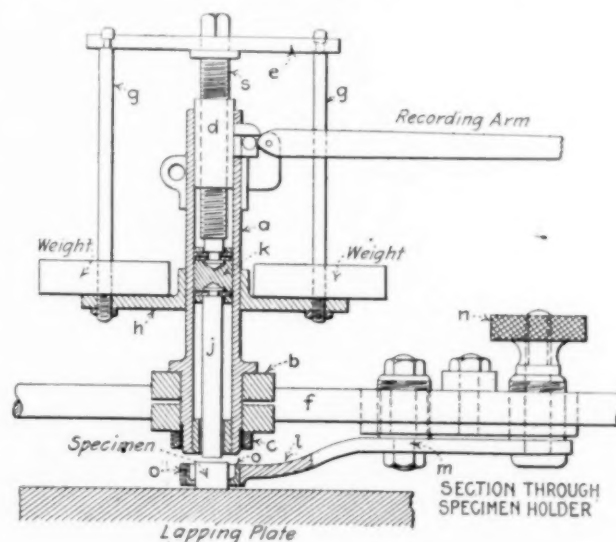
SECTION THROUGH SPECIMEN HOLDER
